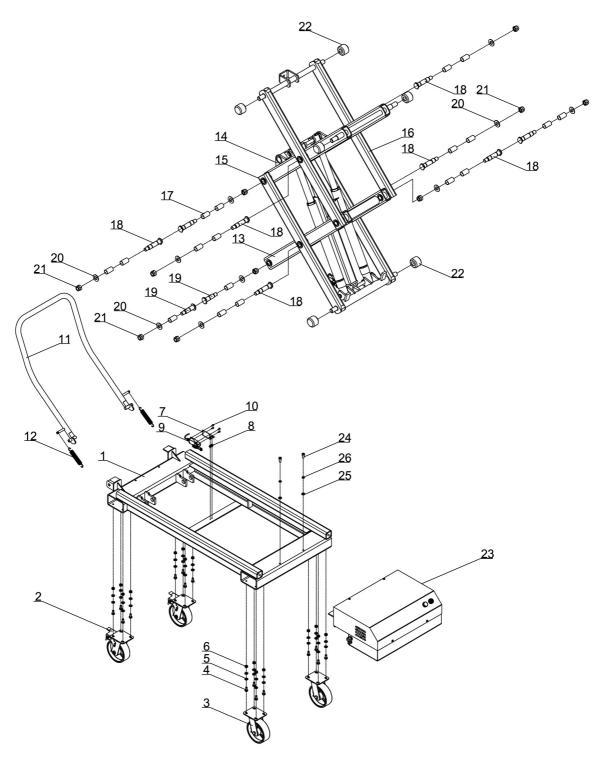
Spare parts drawing 1 - FHT-B 1200
